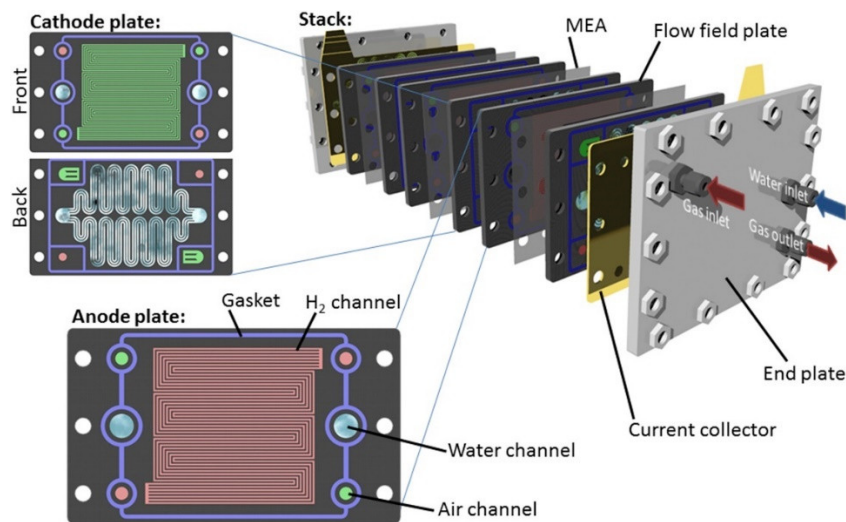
PEFC stack assembly comprising an exploded view (right side), cathode and anode BPPs showing gas and heat-transfer fluid channels (left side) [7].
